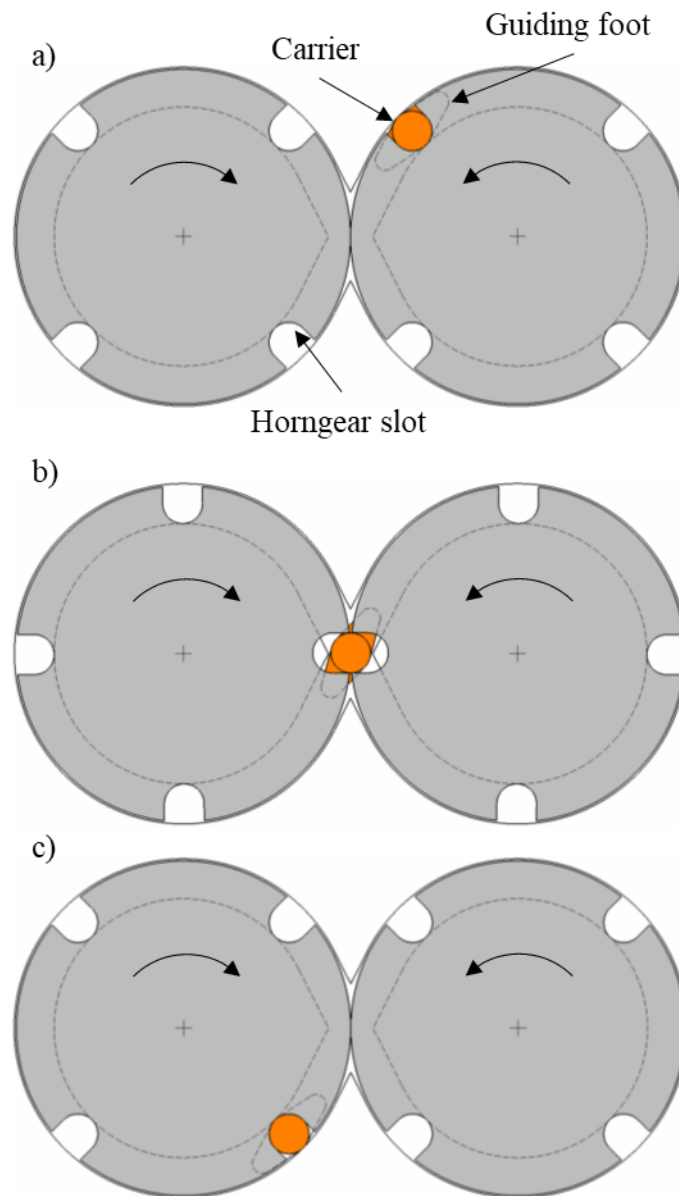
Carrier transfer between horngears. The arrows indicate the direction of rotation of the horngears a) Initial position b) Carrier transfer at a track intersection c) Final position : carrier transfer is completed
